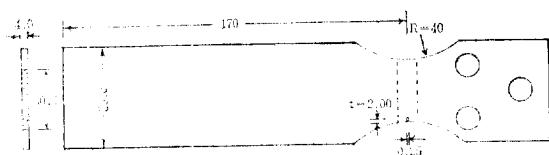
Dimensions of Test Specimen (Unit : mm)
